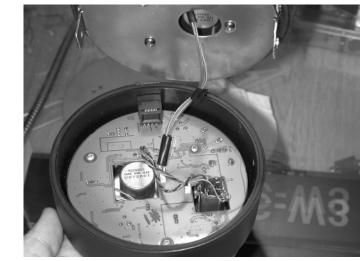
Connecting customer and operator assemblies prior to final mounting.
